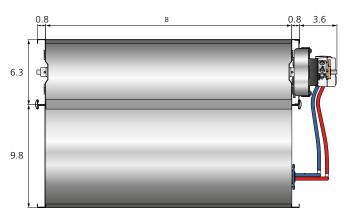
Dimensions (mm), REACT V GMB rectangular.
